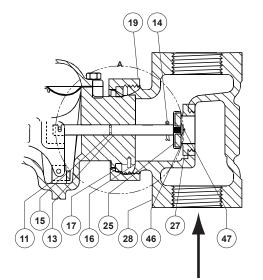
Type Y692VBM O-Ring Stem Seal Detail
